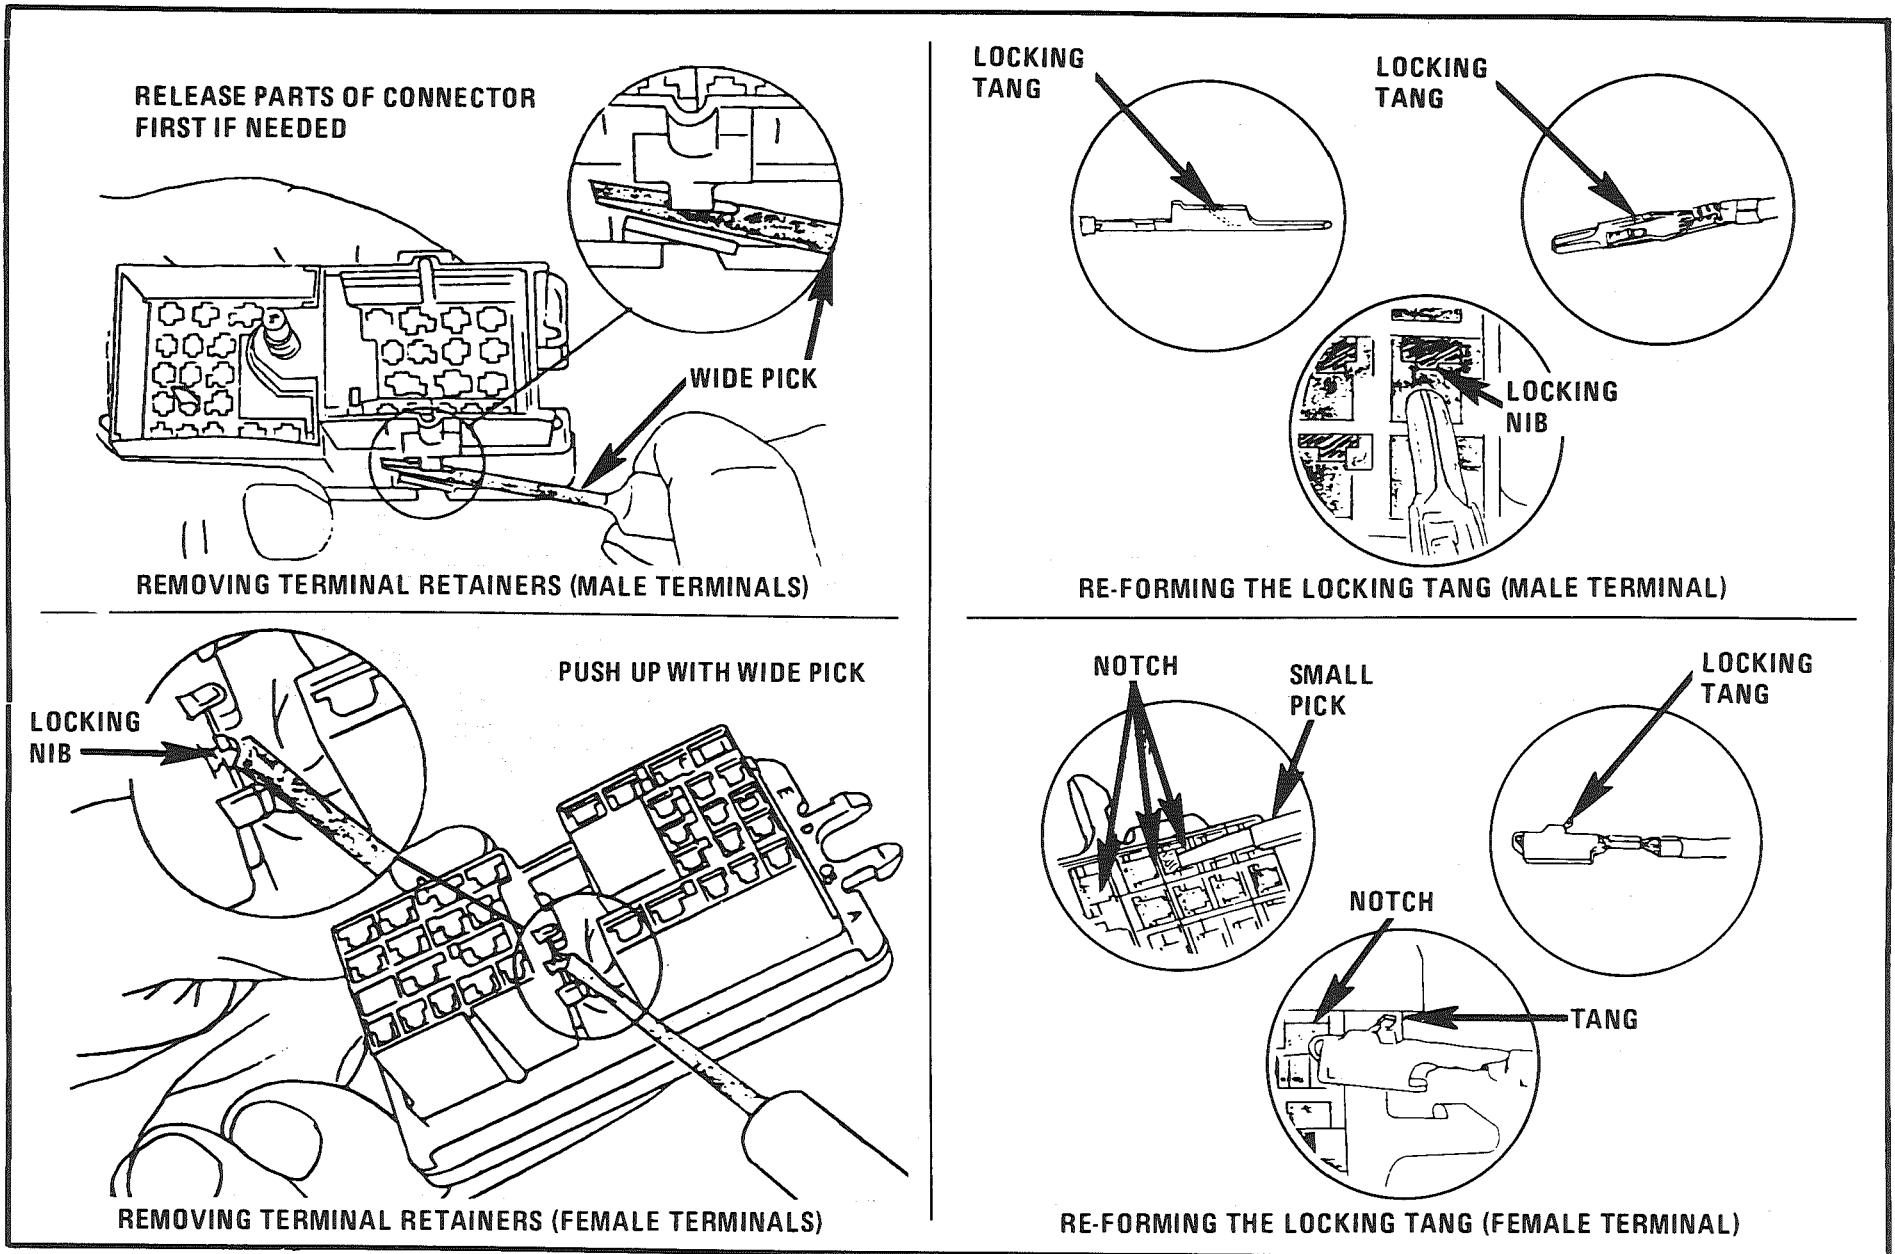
Metri-pack Type Connectors -- Push-To-Seat Type
